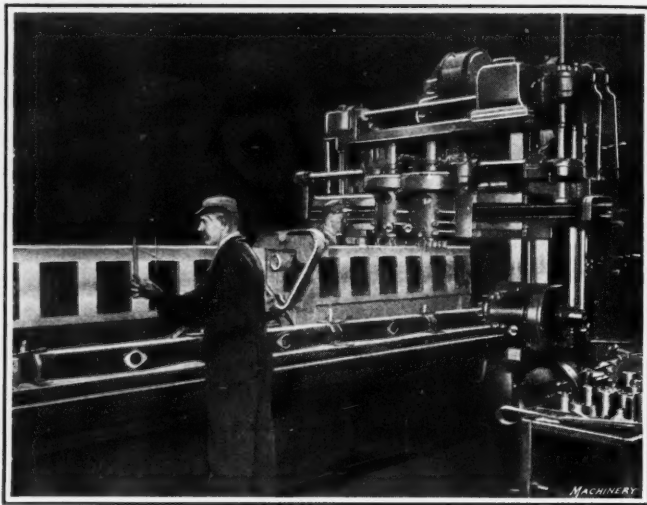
Ingersoll Milling Machine working on Crank-case of Six-cylinder, 120-horsepower Engine and Radiator Headers simultaneously
